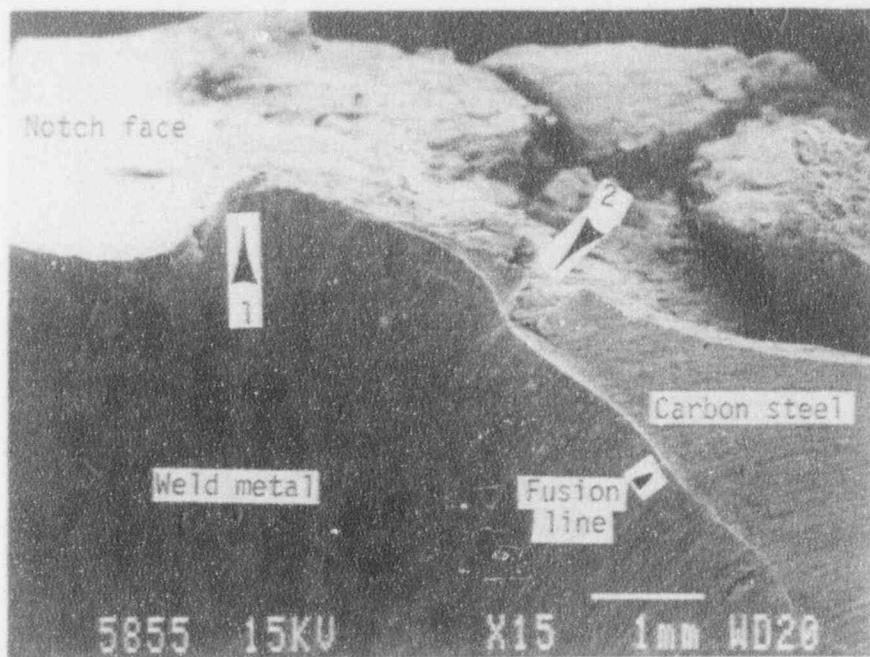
Photograph of tested SEM Charpy Specimen No. 4 showing first part of the fracture path in the carbon steel immediately adjacent to the weld
